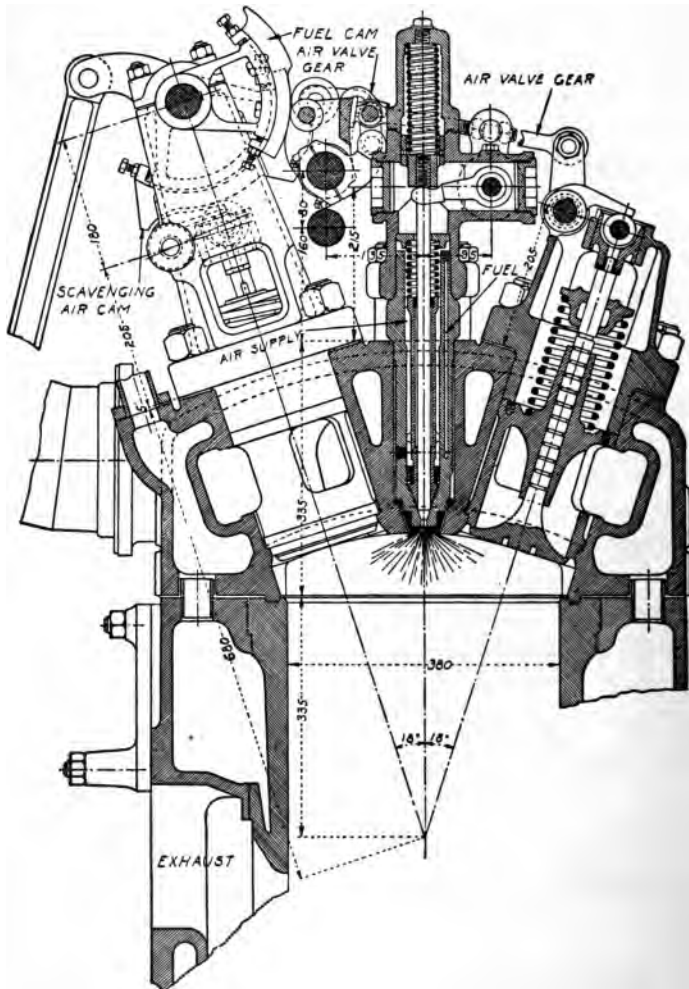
Cylinder Head of Sulzer-Diesel Engine
